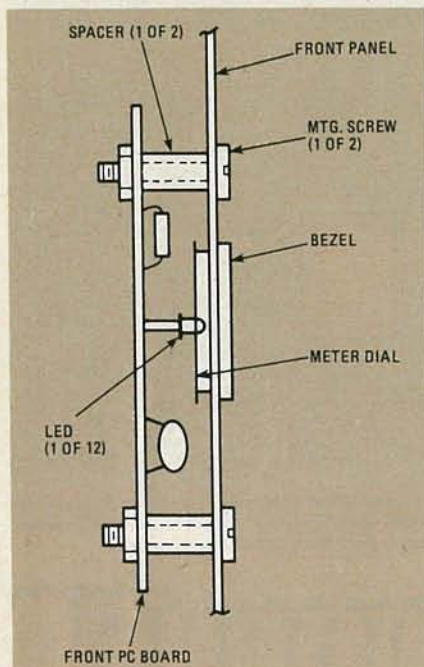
CROSS-SECTIONAL DRAWING shows how parts are fastened to the front panel.
